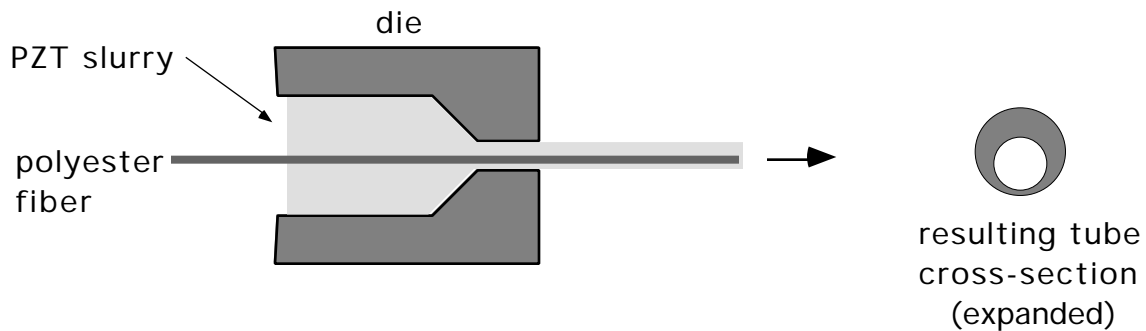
Schematic showing extrusion of PZT slurry onto polyester fiber.
